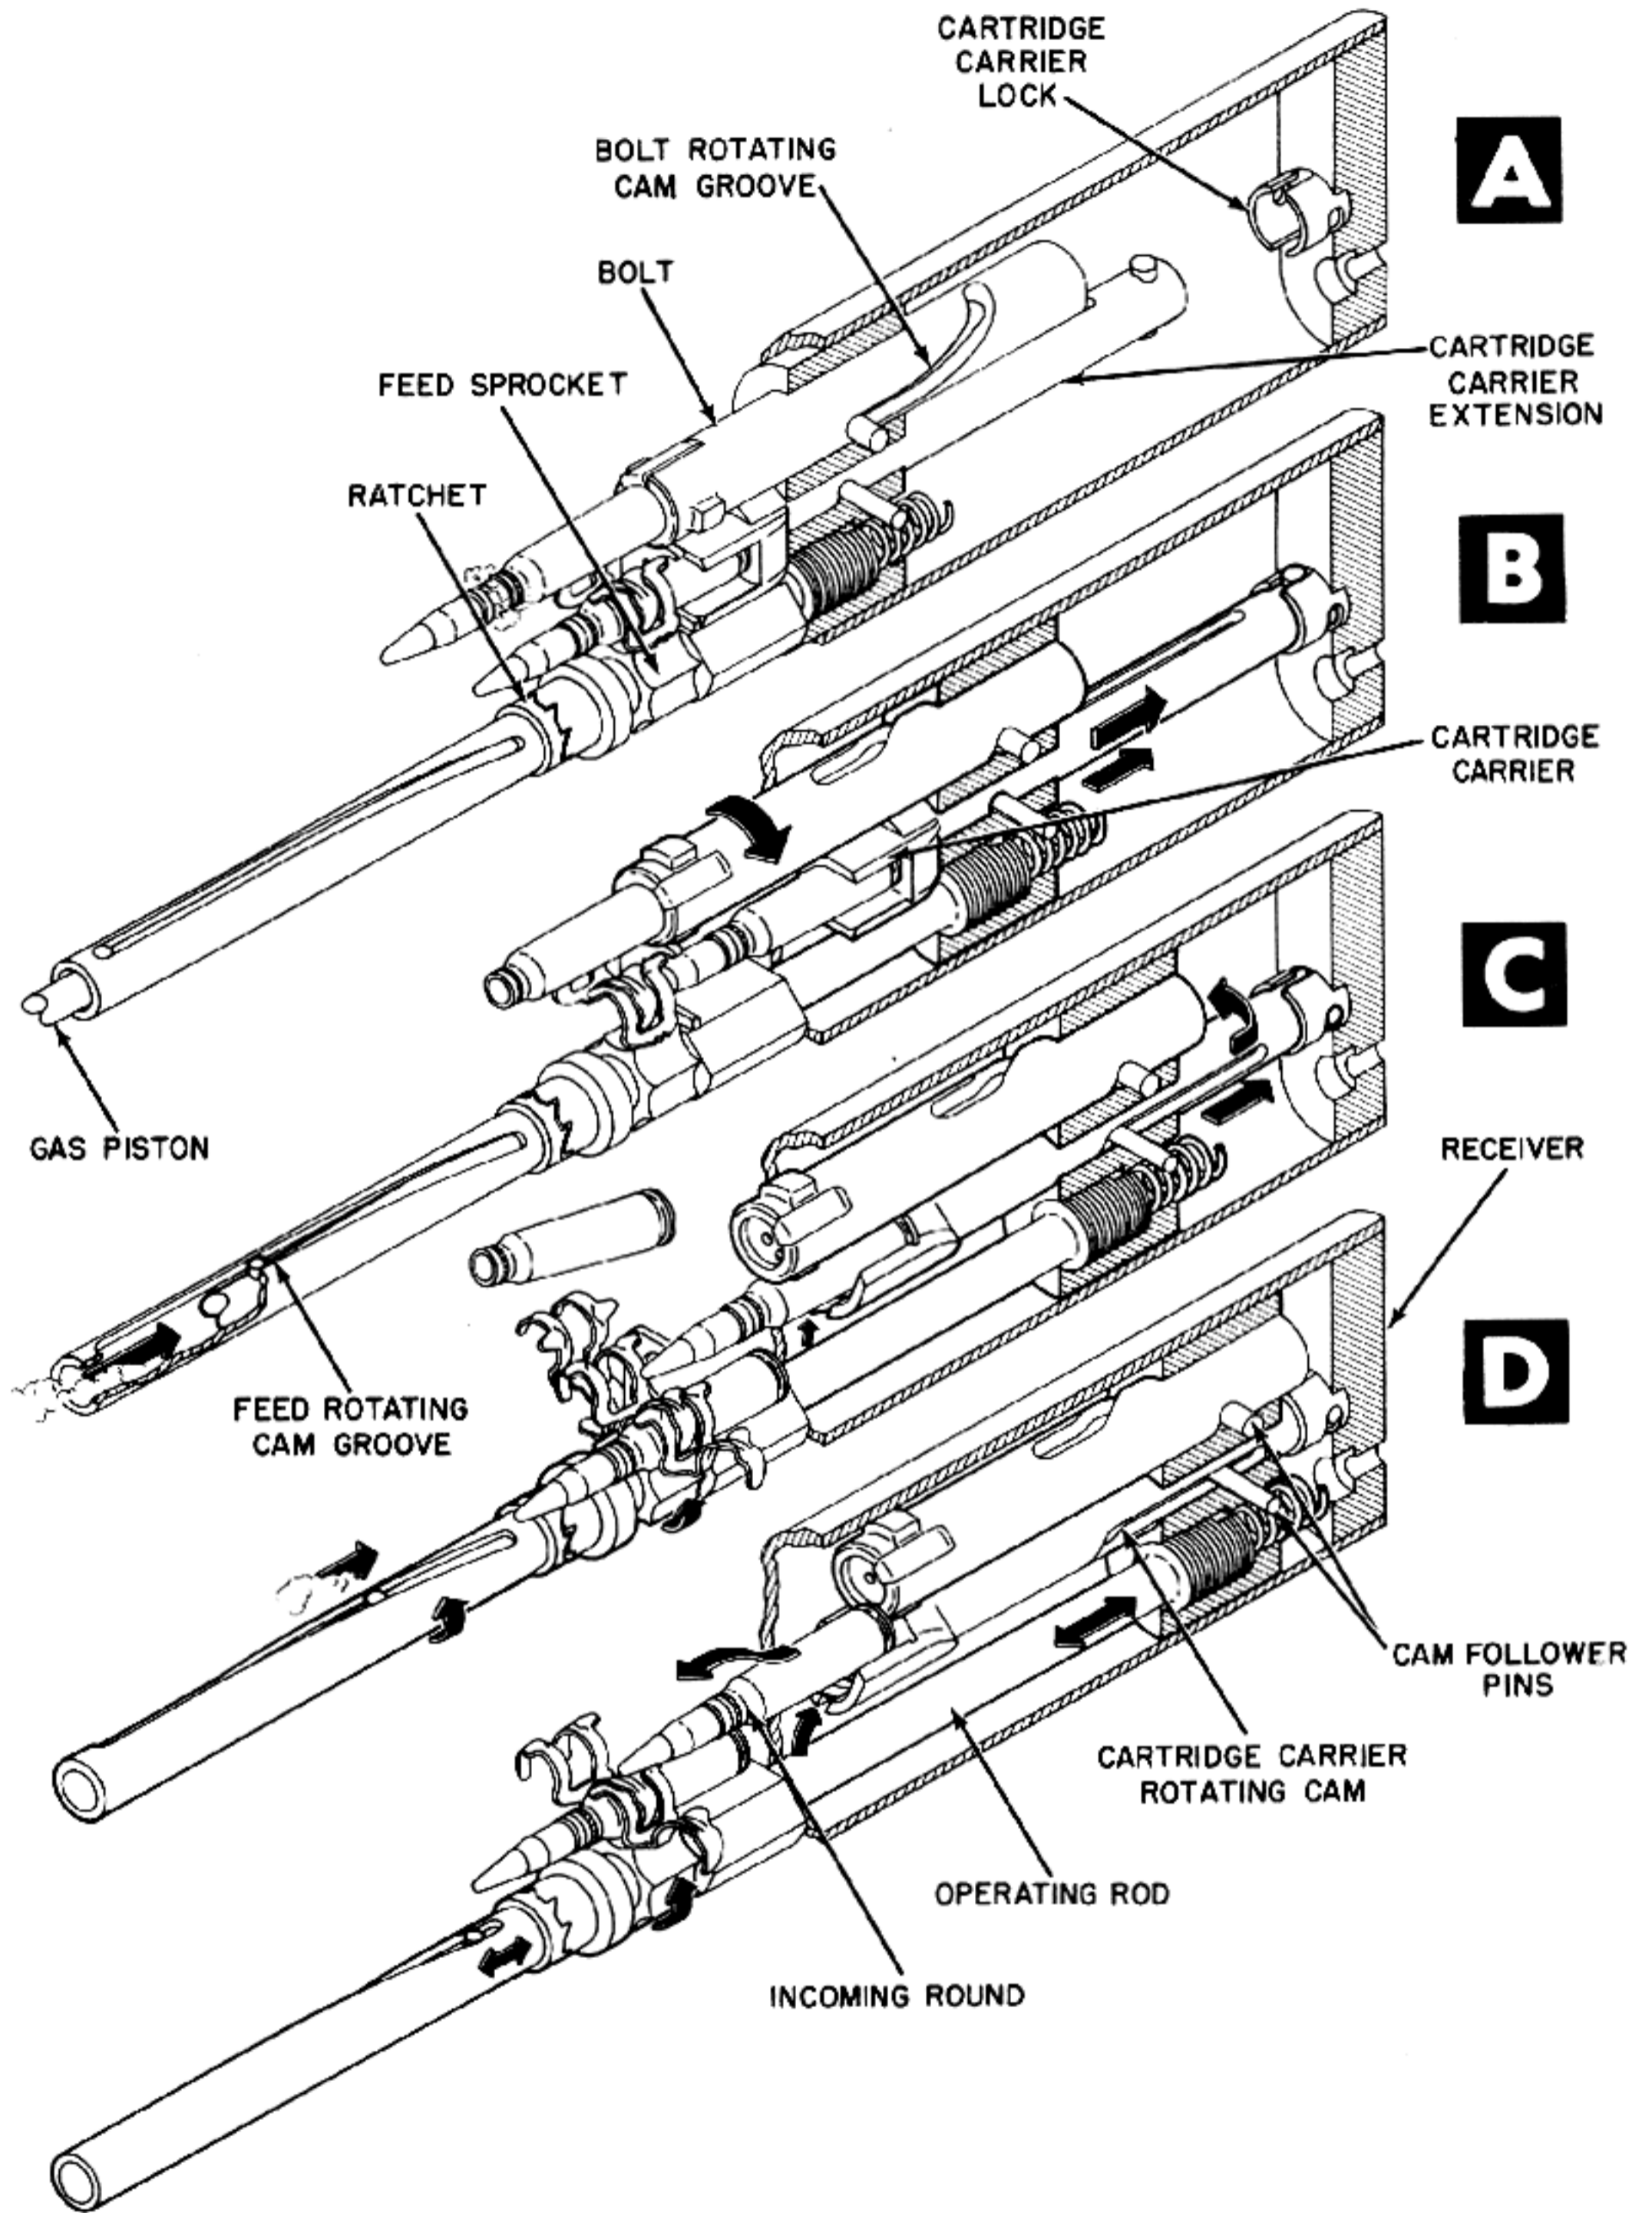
Solid Bolt Unlocked by Action of Operating Rod on Cam Groove in the Bolt.
